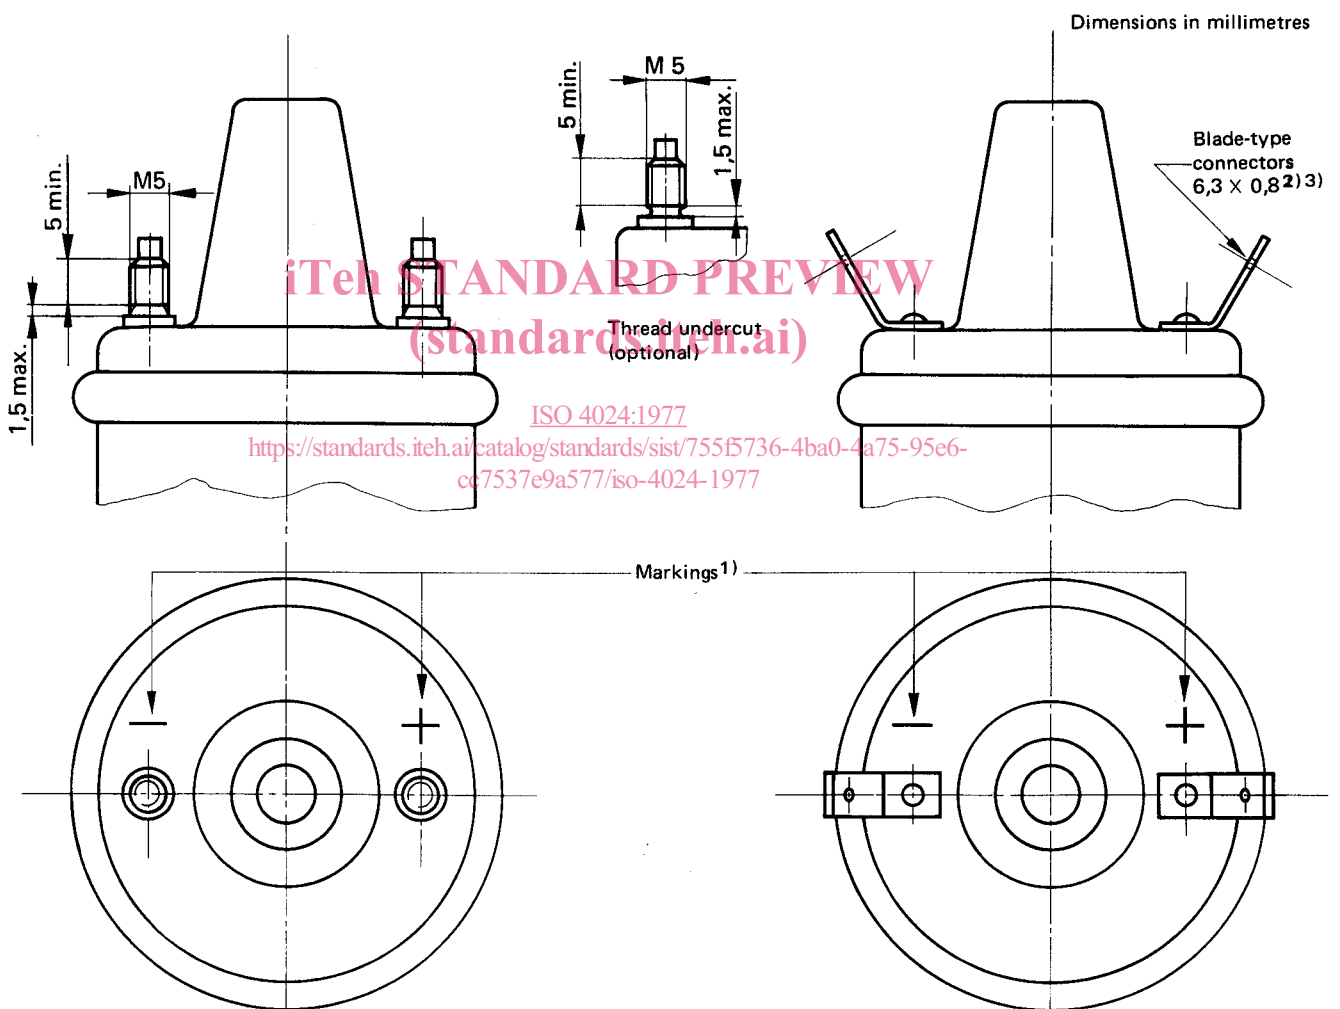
Ignition coils with threaded terminals – Type 1
